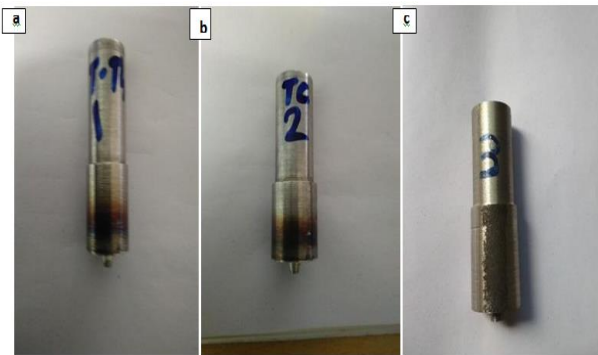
shows the tool pin profile geometry a) Triangular pin profile b) Tapered Cylindrical pin profile c) Cylinder pin with Flutes
